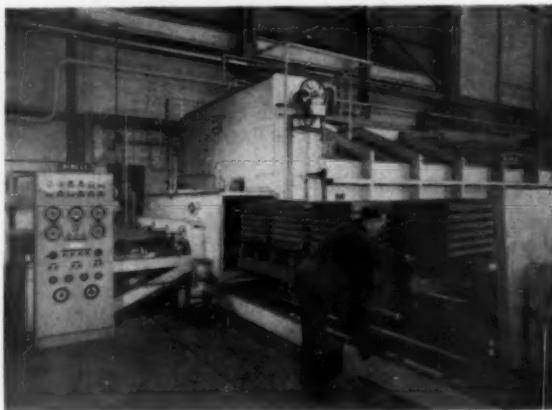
The larger of two bogie hearth furnaces for the treatment of large steel forgings and castings.
